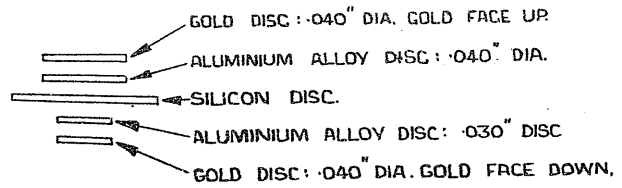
EXPLODED VIEW OF TRANSISTOR CORE ASSY.
